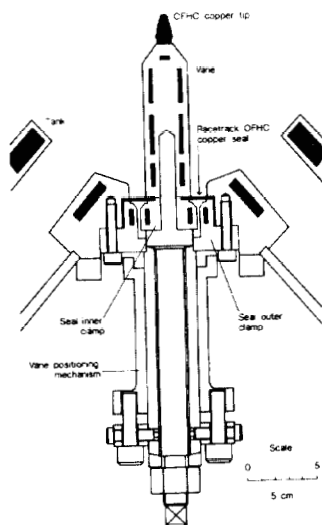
Section view of RFQ showing cooling channels and details of vane supports and the vane-to-tank seal.
